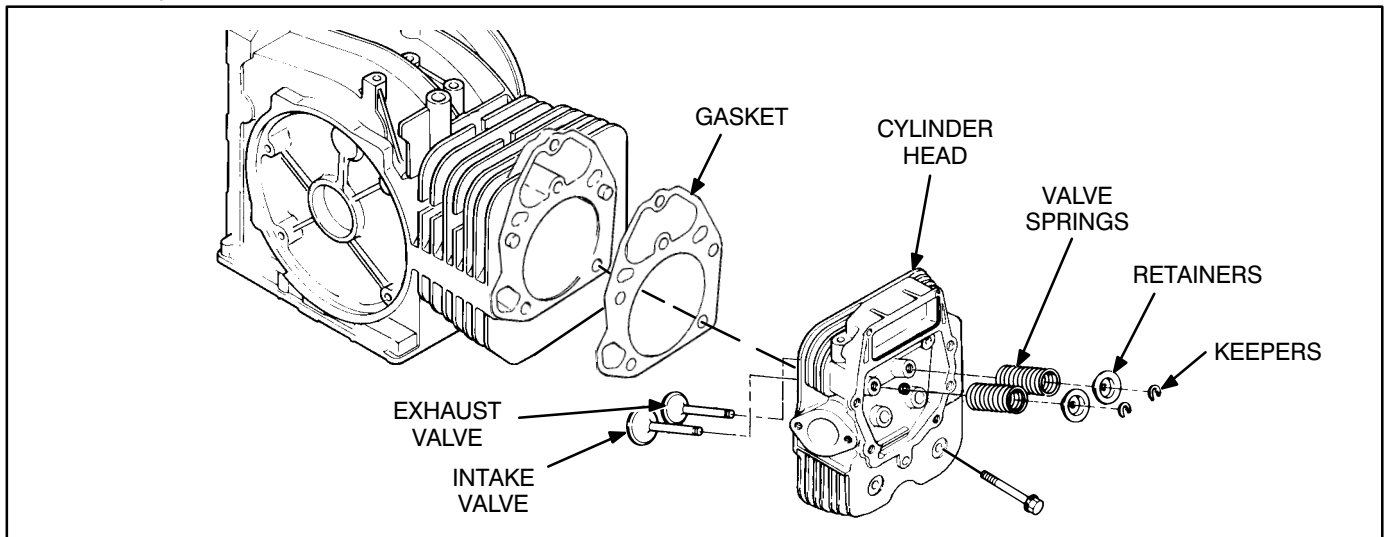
OVERHEAD VALVE SYSTEM
